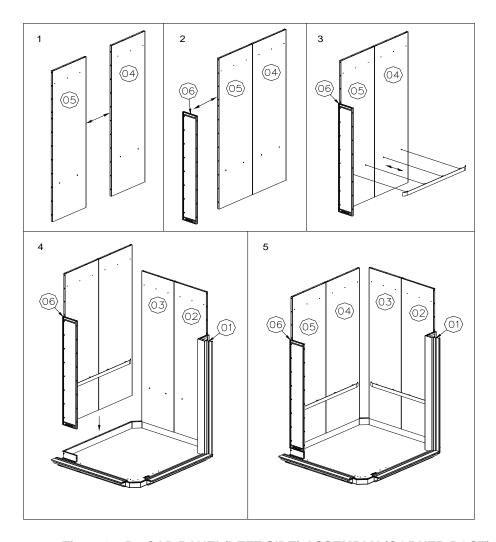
B. CAR PANEL(LEFT SIDE) ASSEMBLY (CORNER POST)
